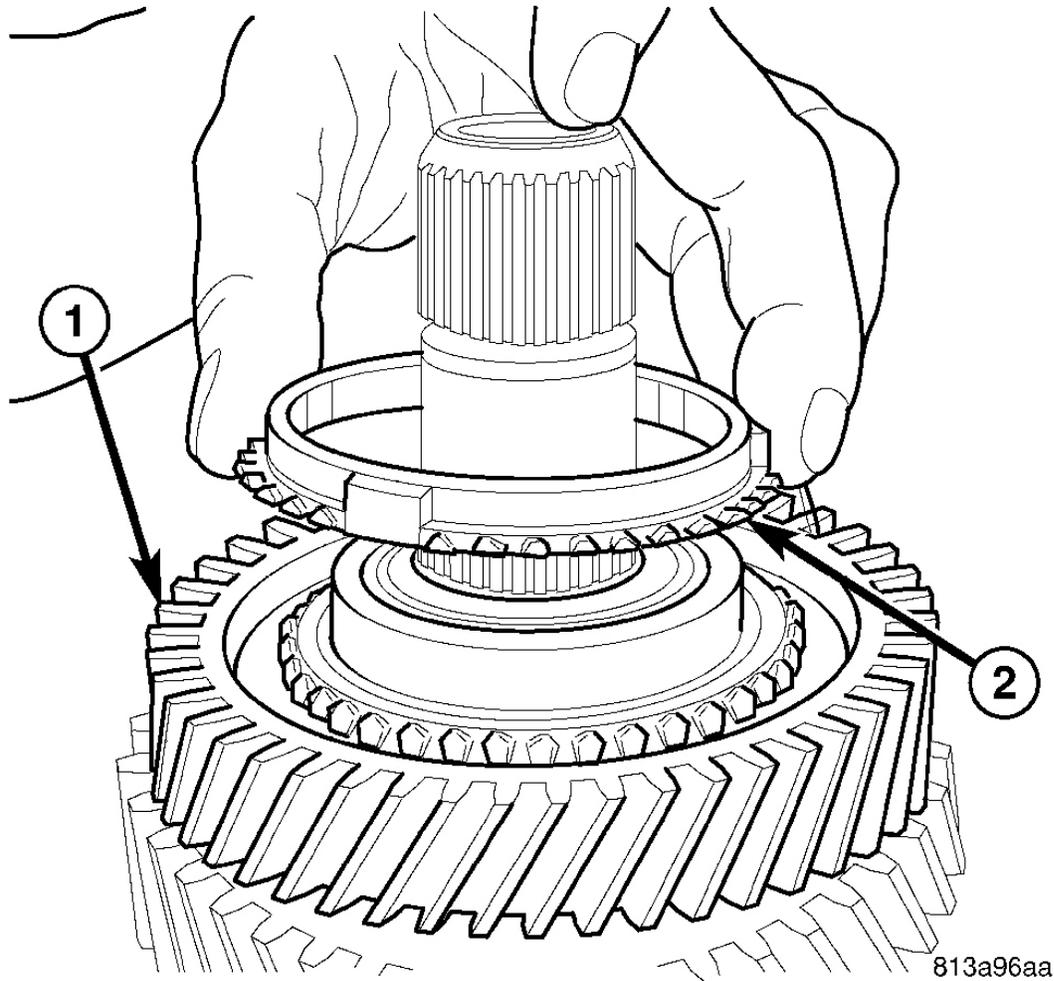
Identifying Reverse Gear & Synchronizer Ring
